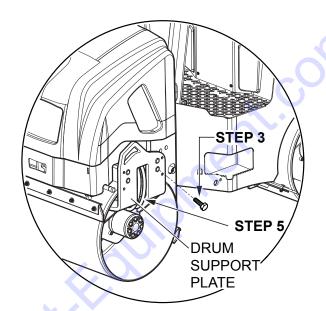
Exciter Assembly Removal/Installation (Front Drum - Right Side)
